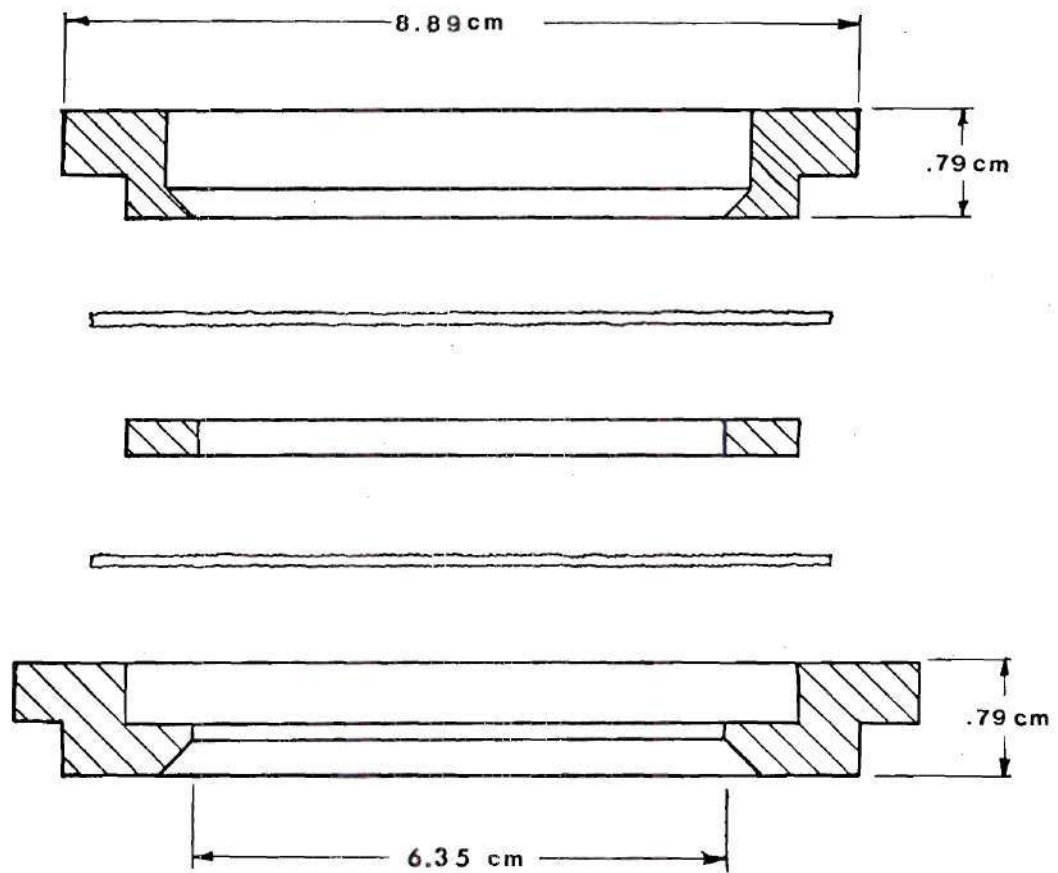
Cross Sectional View of the Fabric Assembly Holder
